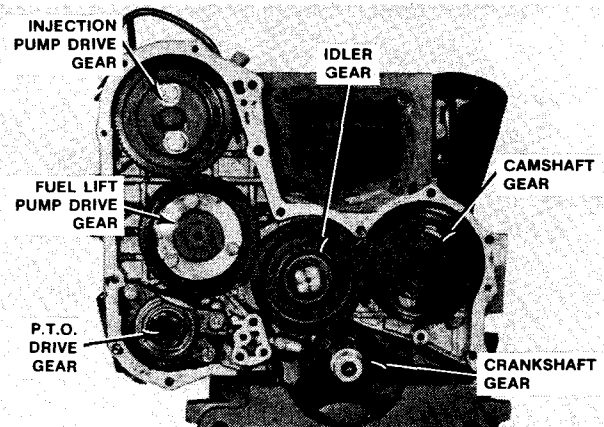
Timing Gear Assembly - Cover Removed (SSD-327 and SSD-437)
